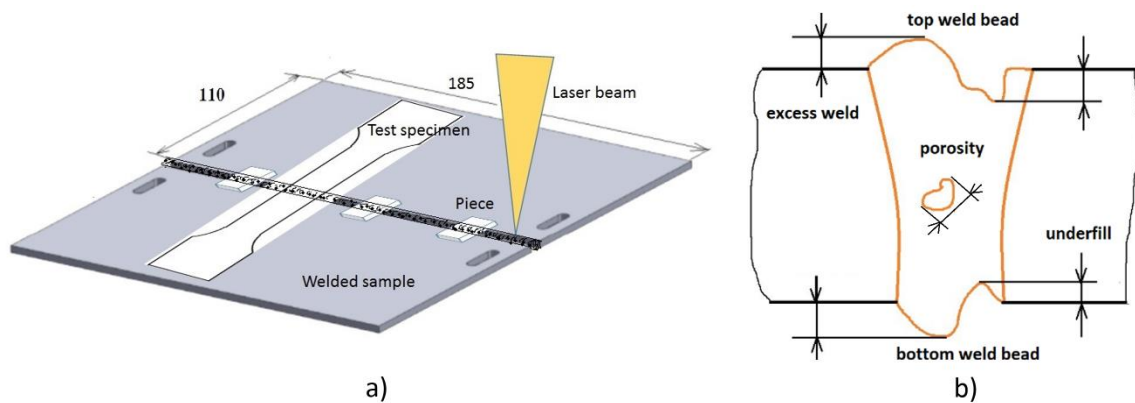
Schemes of (a) location of specimens and pieces in the weld sample and (b) measurements made on the cross section of the weld bead
